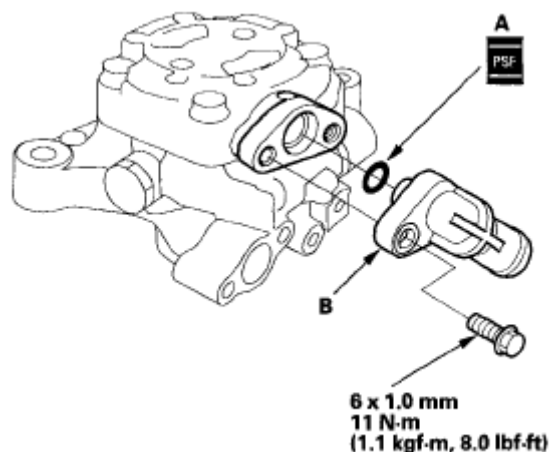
Identifying Power Steering Fluid O-Ring (With Torque Specifications)
